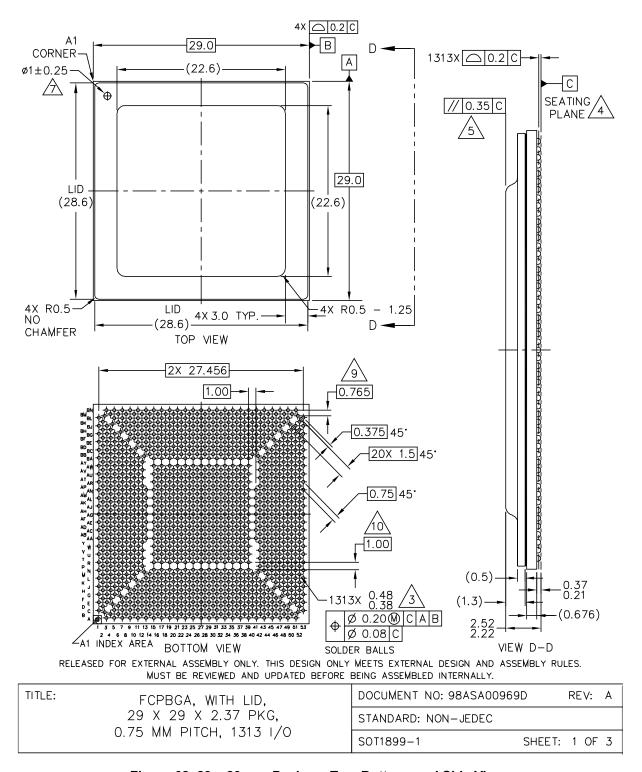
29 x 29 mm Package Top, Bottom, and Side Views
